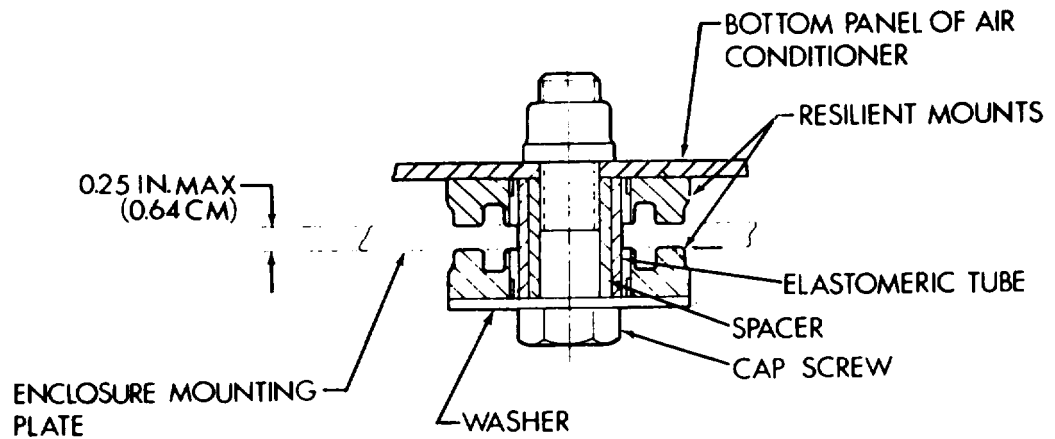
Installation Dimensions (Sheet 5 of 6)
